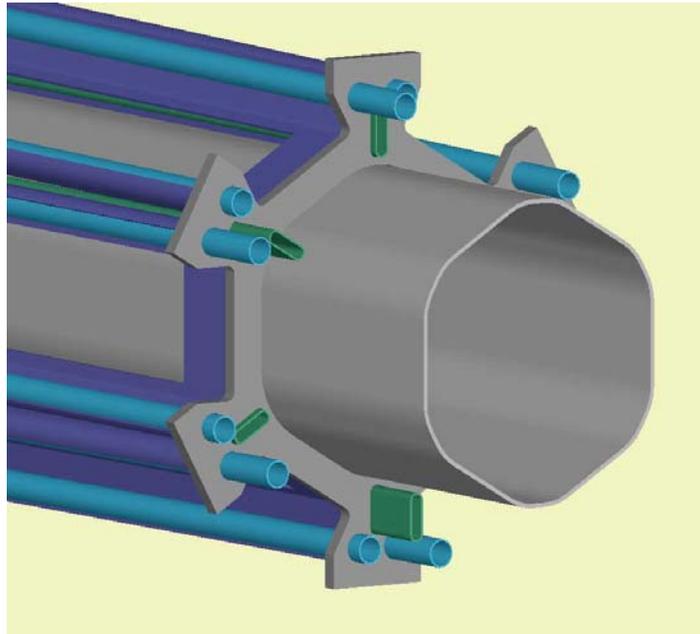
Cooling tubes end in the manifolds of the outer bulkhead.
